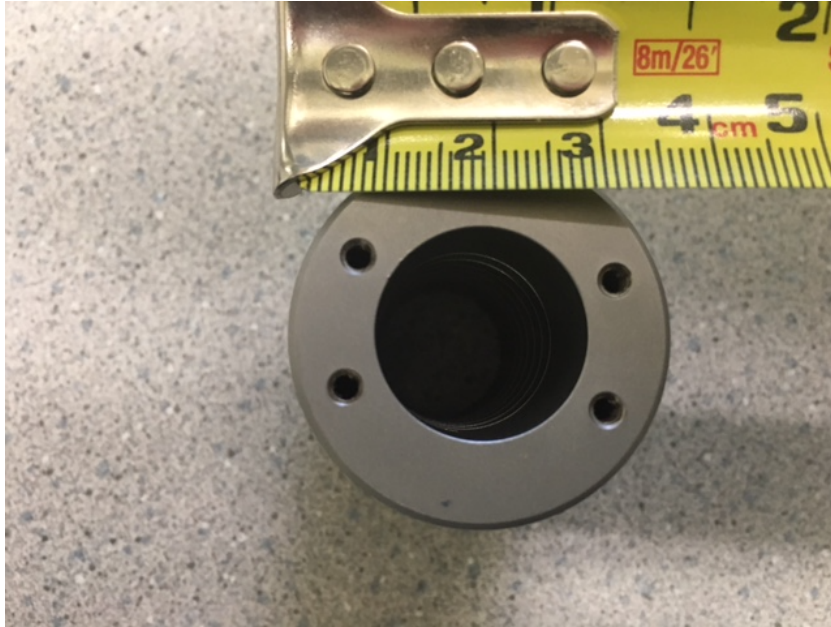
Top View of Helical Machined Spring Manufactured for Test Bed
